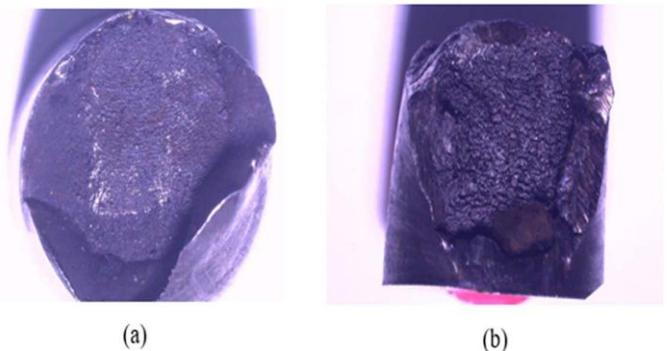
Macrography Photo Results of Connecting Rod Bolt Fractures, (a) Bolt 1, (b) Bolt 2
